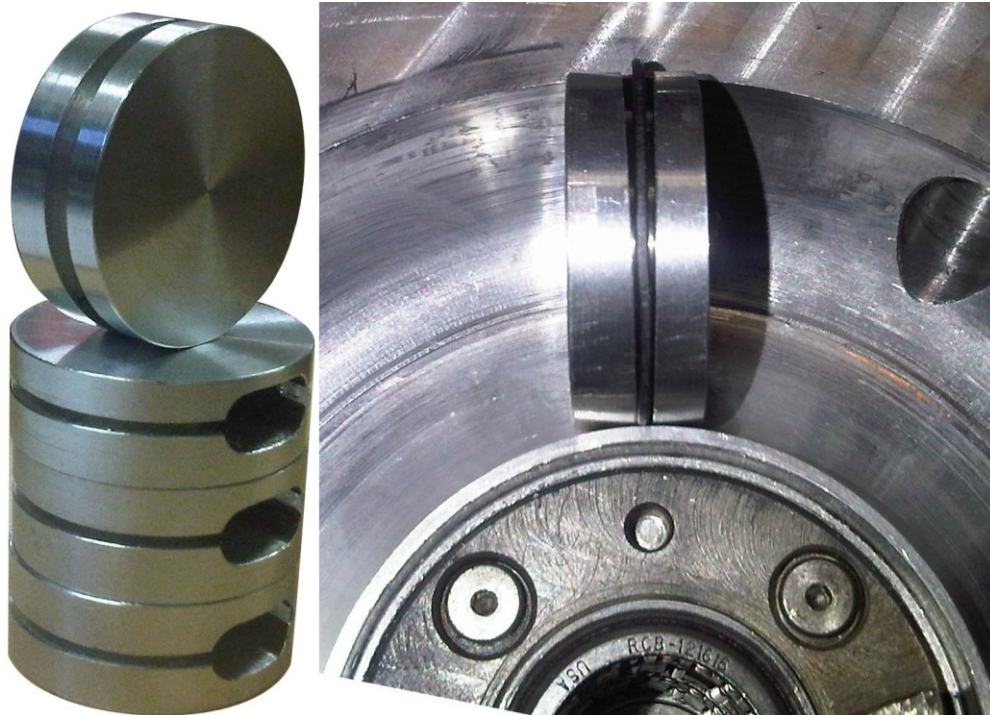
Final aluminum pistons manufactured (left), and example of piston installed in motor with compression ring seal installed.
